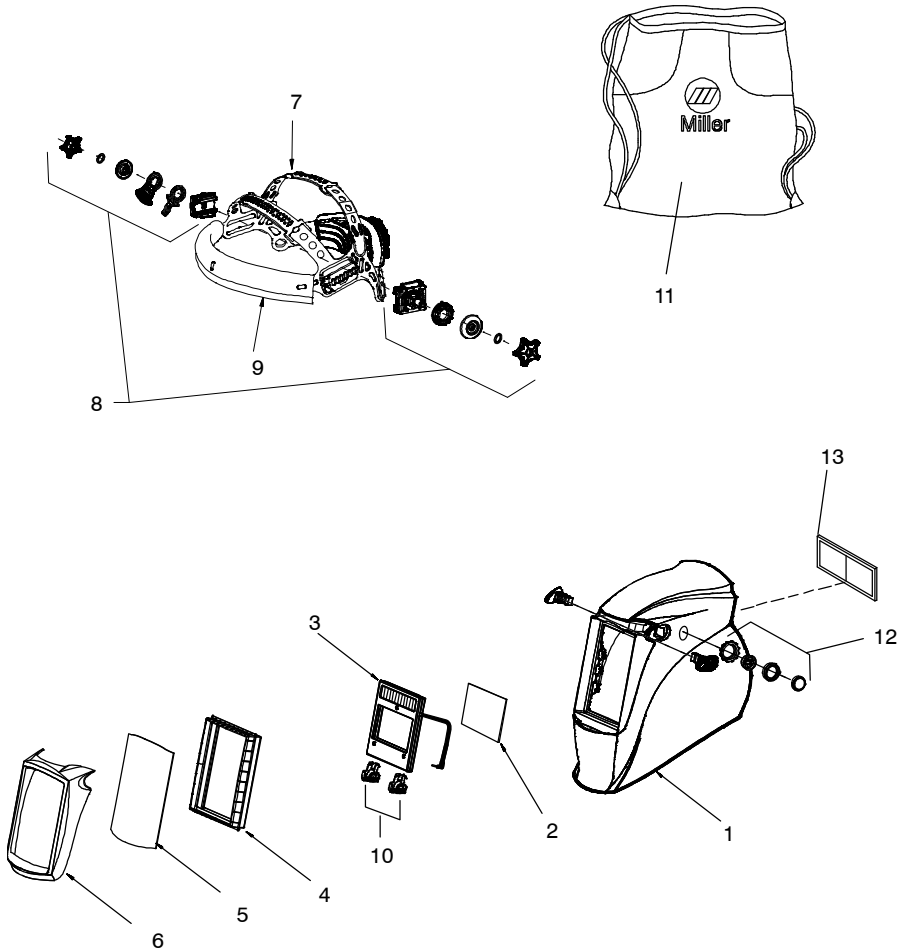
Titanium 7300 Auto-Darkening Welding Helmet
